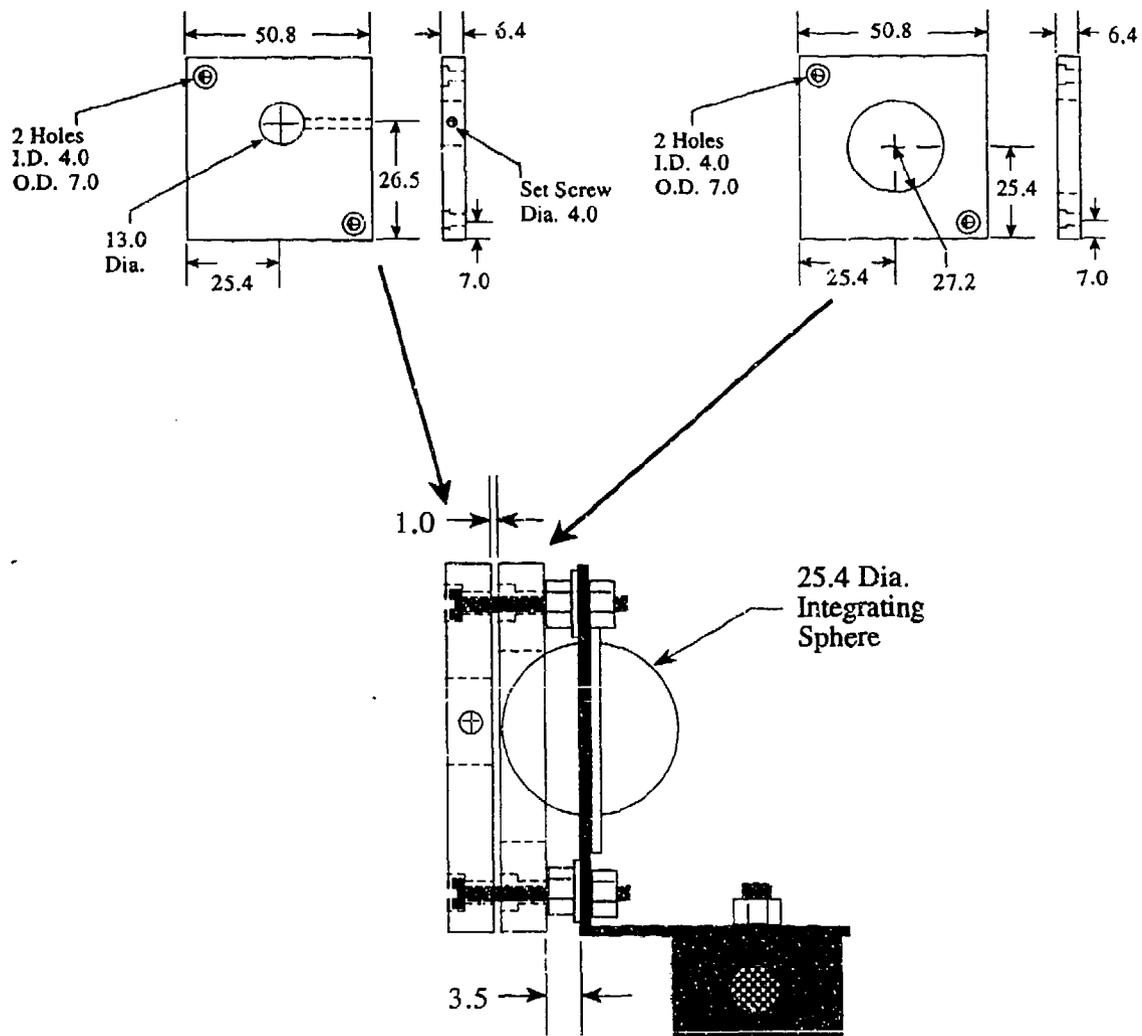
Custom fabrication drawings for item #12, aperture/polarizer holder assembly. Aperture (item # 11) is mounted between the plates, with a 1-mm rubber sheet as a cushion.
